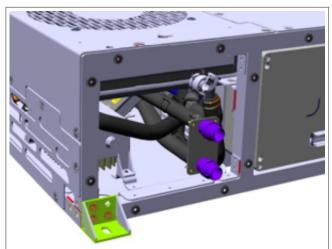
eBTM 2.0 fluid purging valve at the inlet of the radiator
